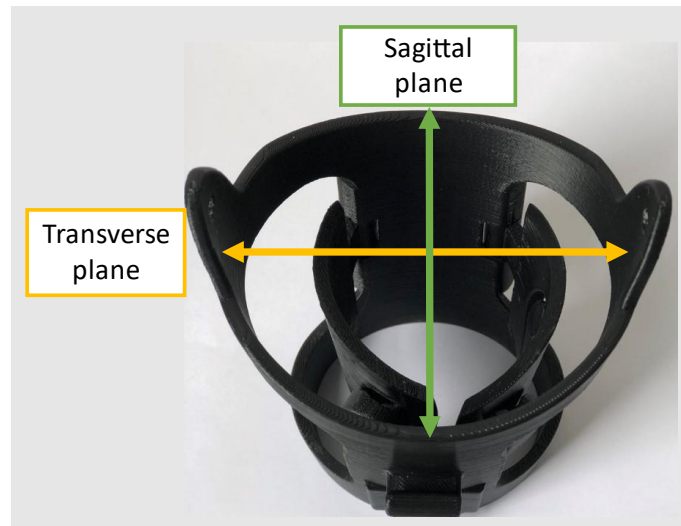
Planes of the socket where measurements are taken for socket fitting. Dimensions along the sagittal plane are very critical for customizing a comfortable socket.
